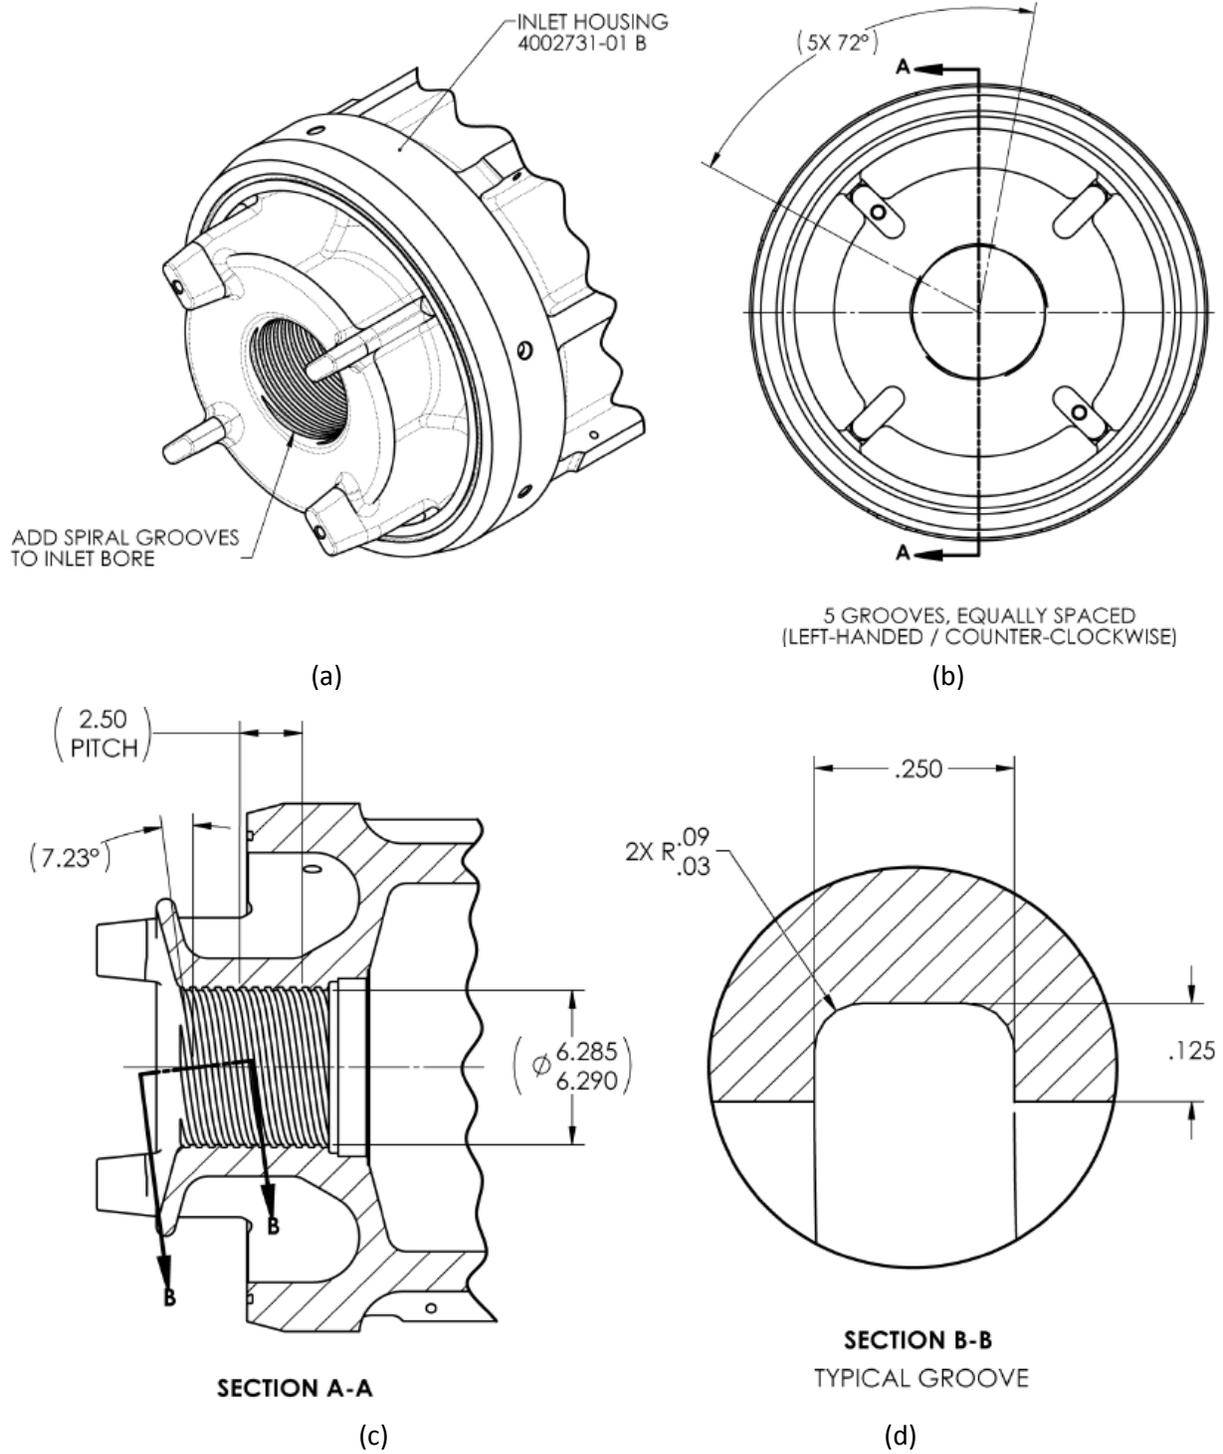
(a)-(d): Machine Drawing of the Modified Inducer Housing with Counter Helical Grooves
